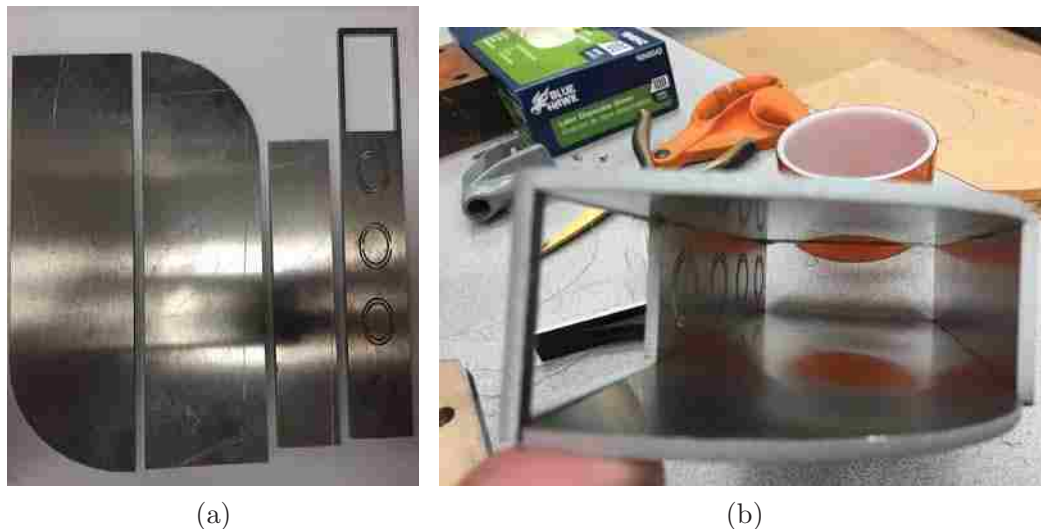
(a)aluminum plates, (b) aluminum plates welded together
